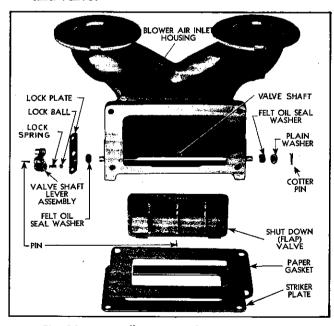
Manually Operated Emergency Engine Shut-Down Details.
